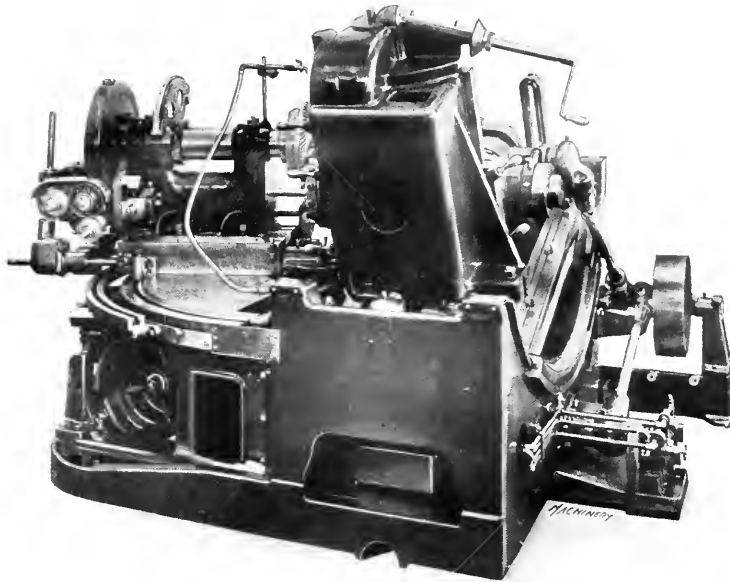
Gleason Generator for machining the Spiral Type of Bevel Gears
